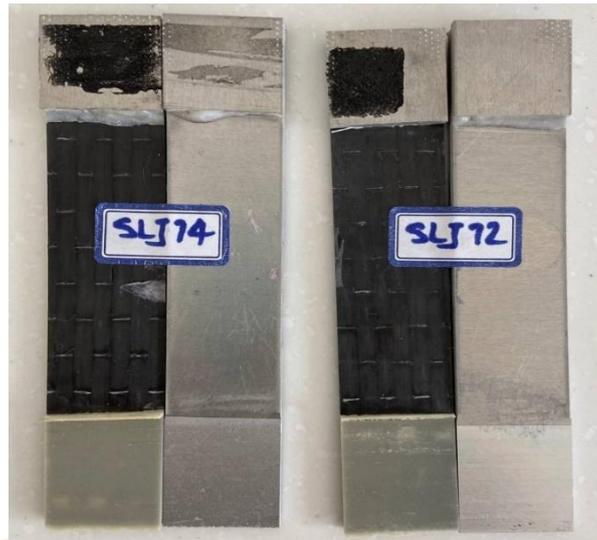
Adhesive failure pattern in specimens after the tensile test
